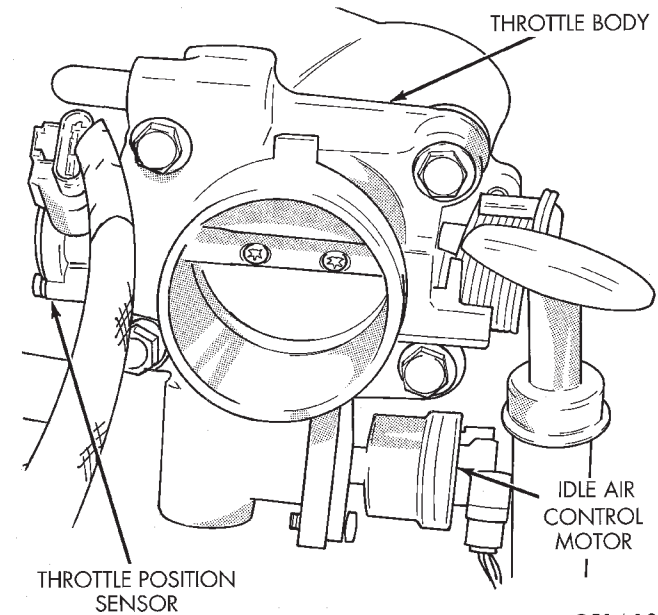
Idle Air Control Motor and Throttle Position Sensor—2.5L Engine
